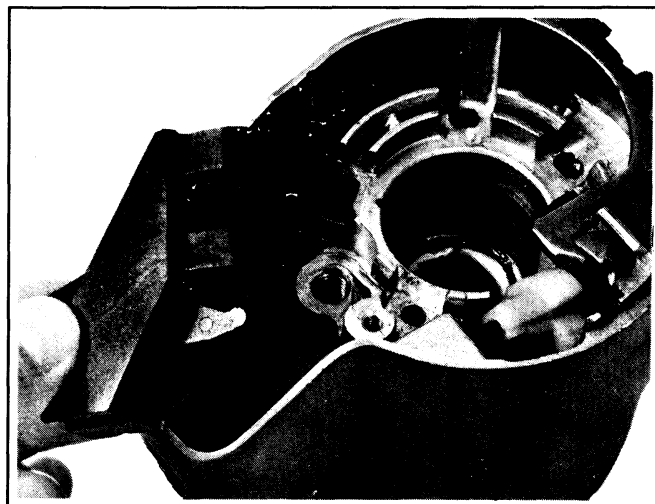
B-82B--Removing Pivot Pin and Pivot assembly-Chevrolet
